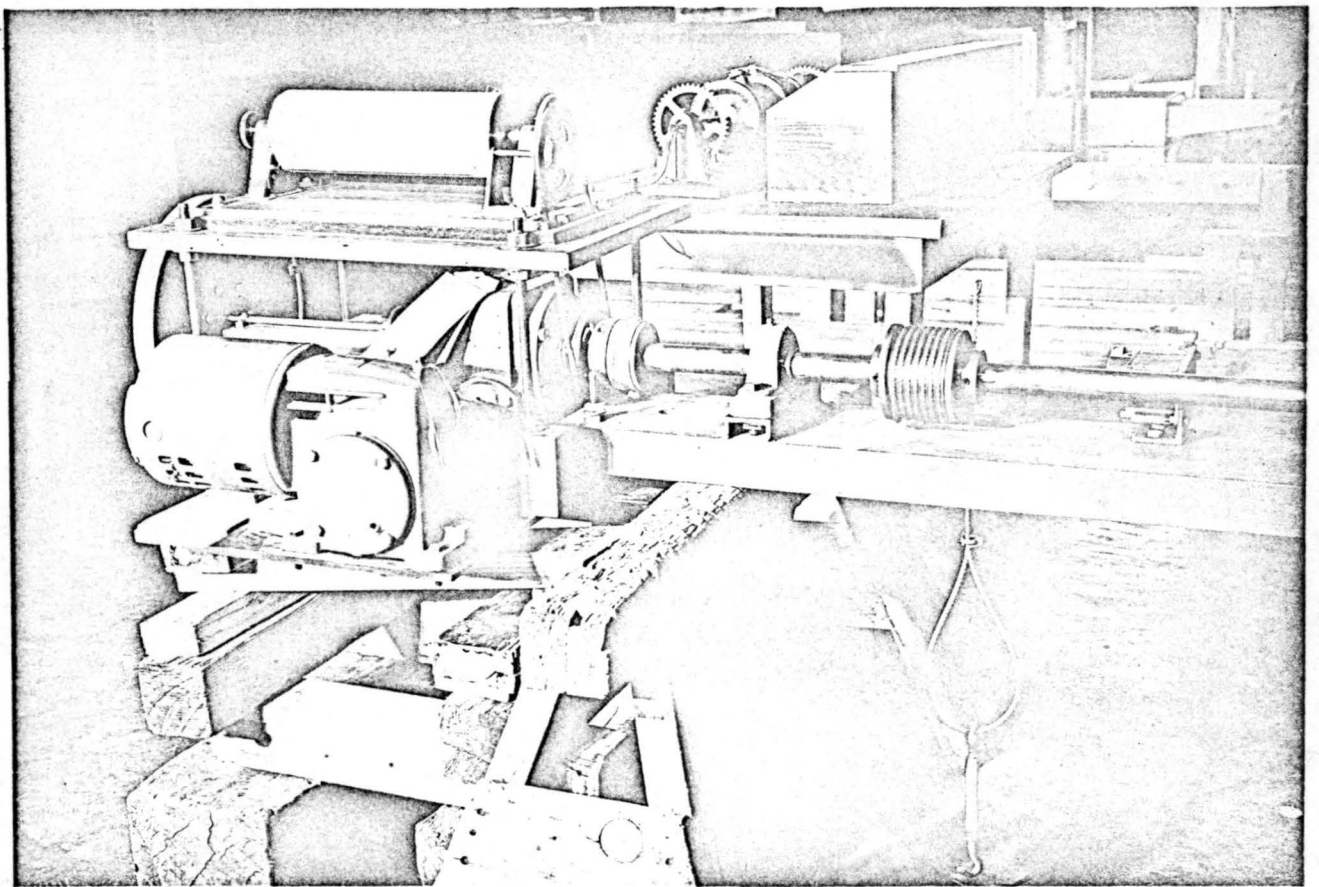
Shop assembly to show motor drive and recording instrument, also $1\frac{1}{4}$ -inch steel shaft with cable drum for gate lift, $\frac{3}{16}$ -inch high tensile steel cable.
